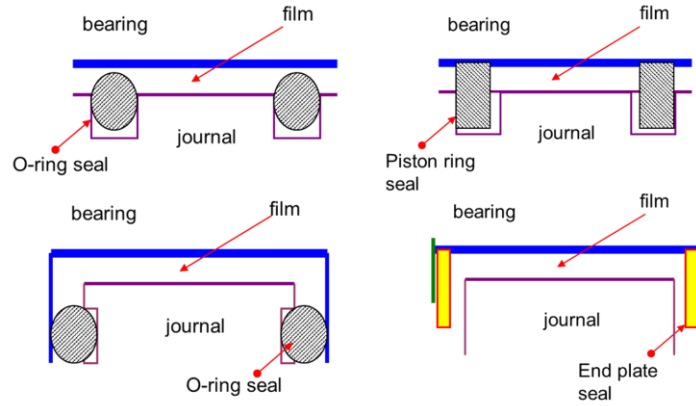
Schematic views of end seals for SFDs: O-rings, piston rings, and end plate seals.
